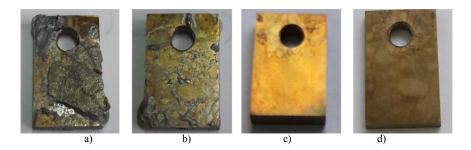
Specimen 7 a), b) front-back before cleaning test c), d) front-back after cleaning test for 1 minute in Sol.2 at 75 °C
